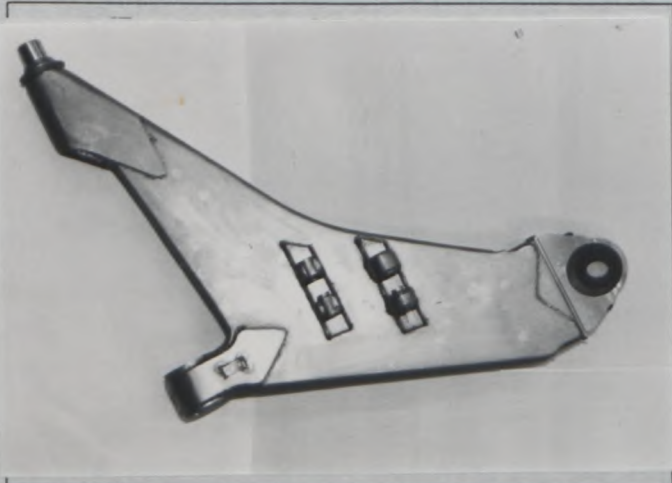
REINFORCED LOWER ARM, FRONT TYPE B
